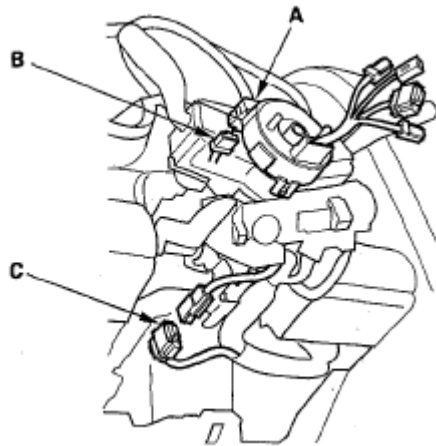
Identifying Cable Reel, 5P Connector And 4P Connector
